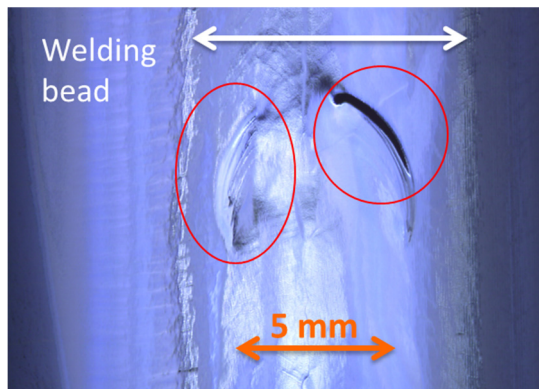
Ripple and crater in welding bead at equator which cause quench [4].
